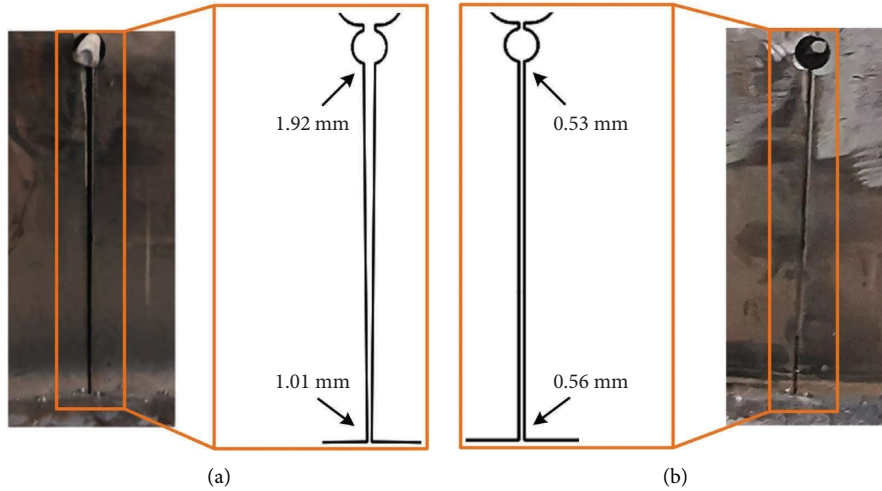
Comparison of the side clearance of the azimuth track. (a) Side clearance before welding. (b) Side clearance after welding.
